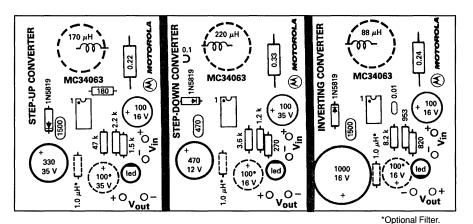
Printed Circuit Board and Component Layout (Circuits of Figure 7, 9, 11)
